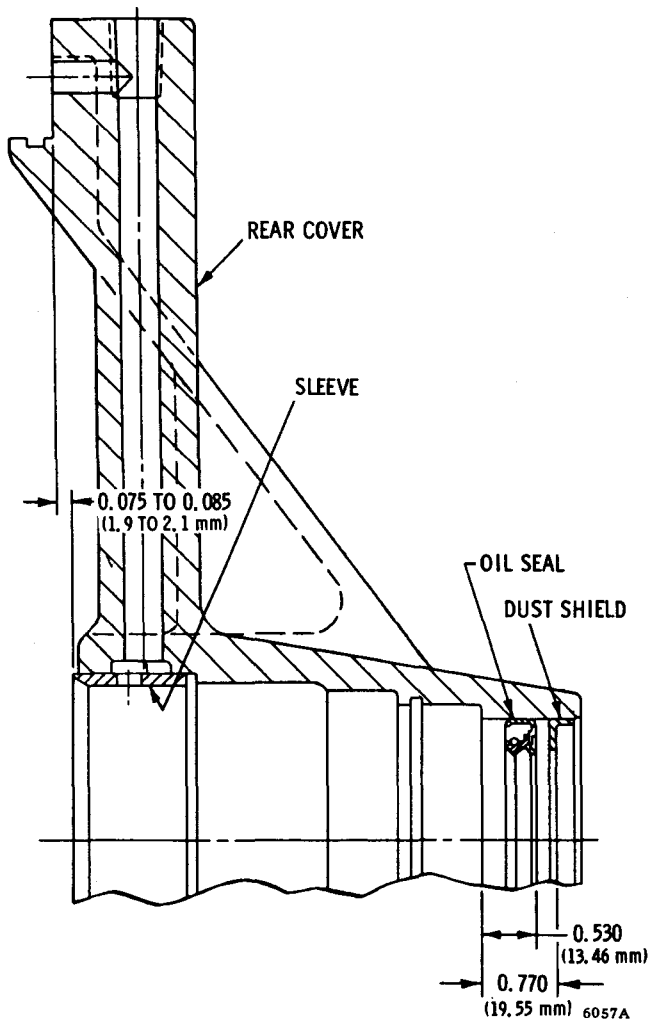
Oil and dust shield installation diagram for TT model with PTO
